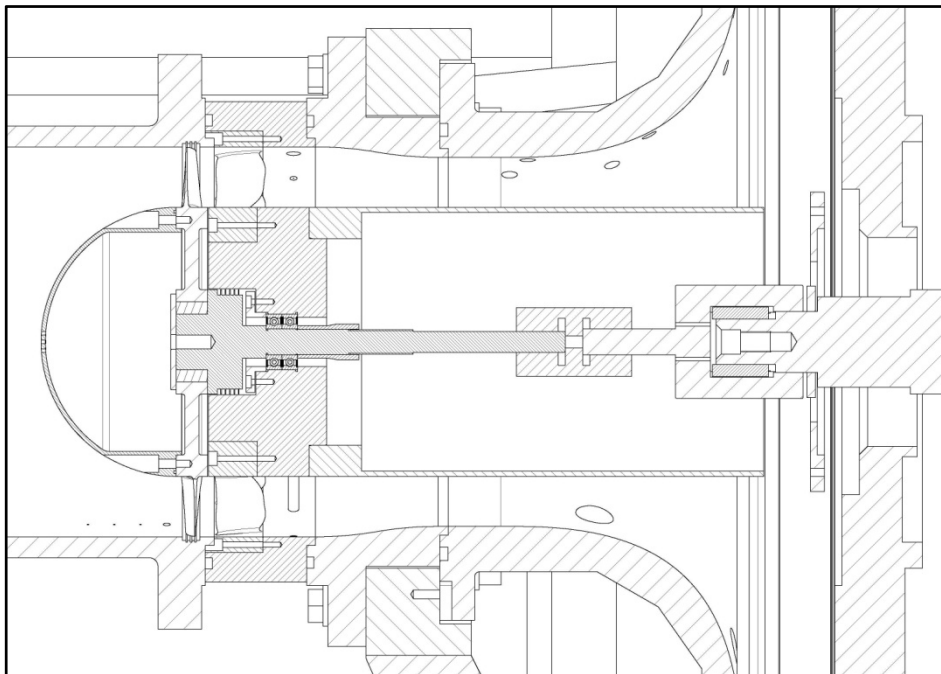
Axial Compressor Configuration: Two 6202-2Z* Explorer Deep Groove Ball Bearings are supporting the Shaft.
